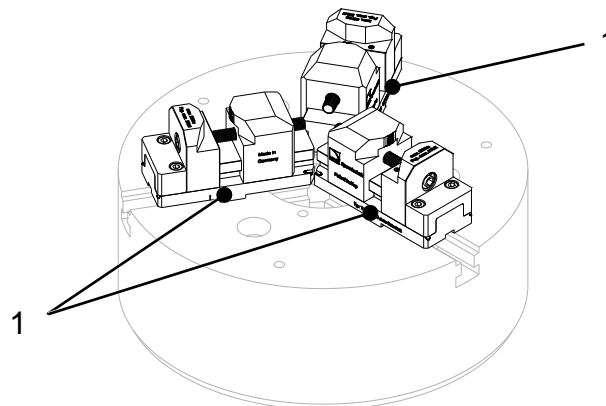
Fitting the InoTop® hybrid clamping jaws
